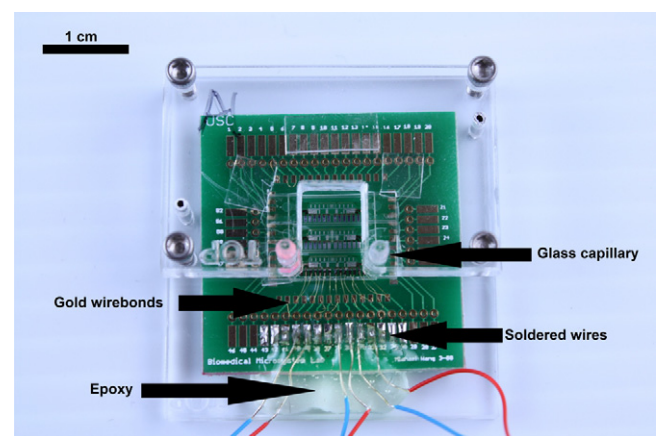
Packaged microfluidic platform in a custom made acrylic jig with gold wirebonds connecting the embedded Pt thermal flow sensors to the PCB. Wires were soldered to the PCB and covered with epoxy to make robust external electrical connections. Glass capillaries aligned to and clamped on top of the SU-8 inlet/outlets provided a fluidic connection to the microchannel.
